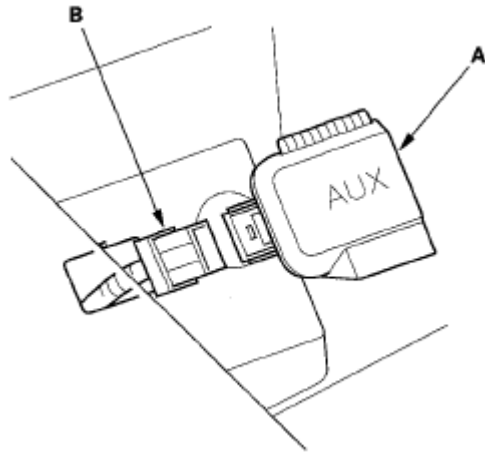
Identifying 5P Connector And Auxiliary Jack Assembly - SC Model
